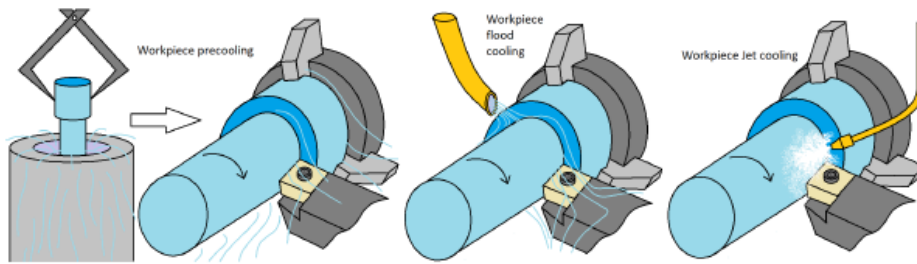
Different strategies for Workpiece Cooling: workpiece pre-cooling, workpiece flood-cooling, workpiece jet-cooling. (credit to L.Losa)
